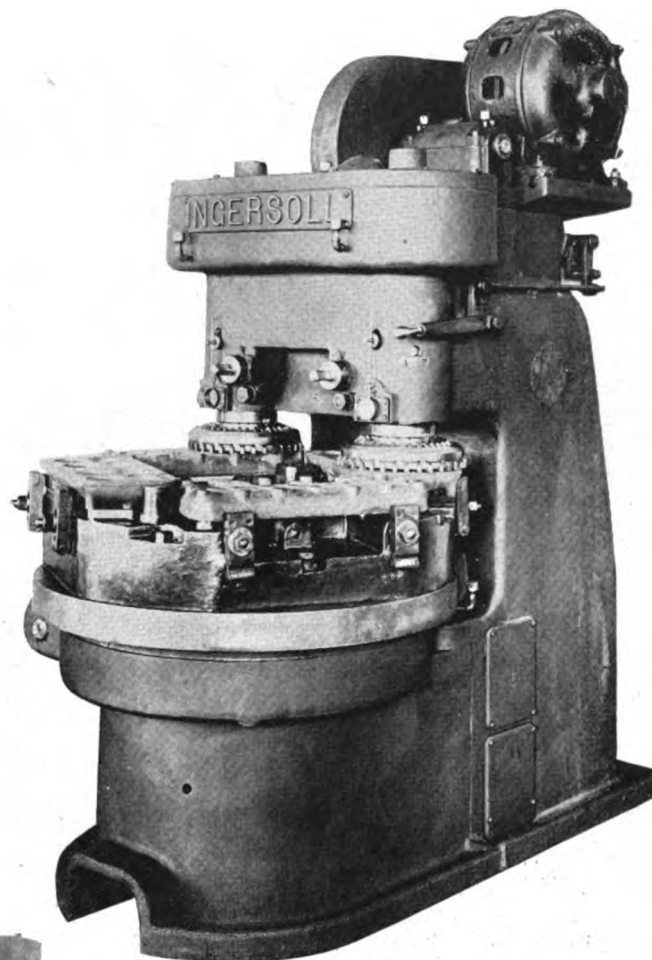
Ingersoll Rotary Continuous Milling Machine
